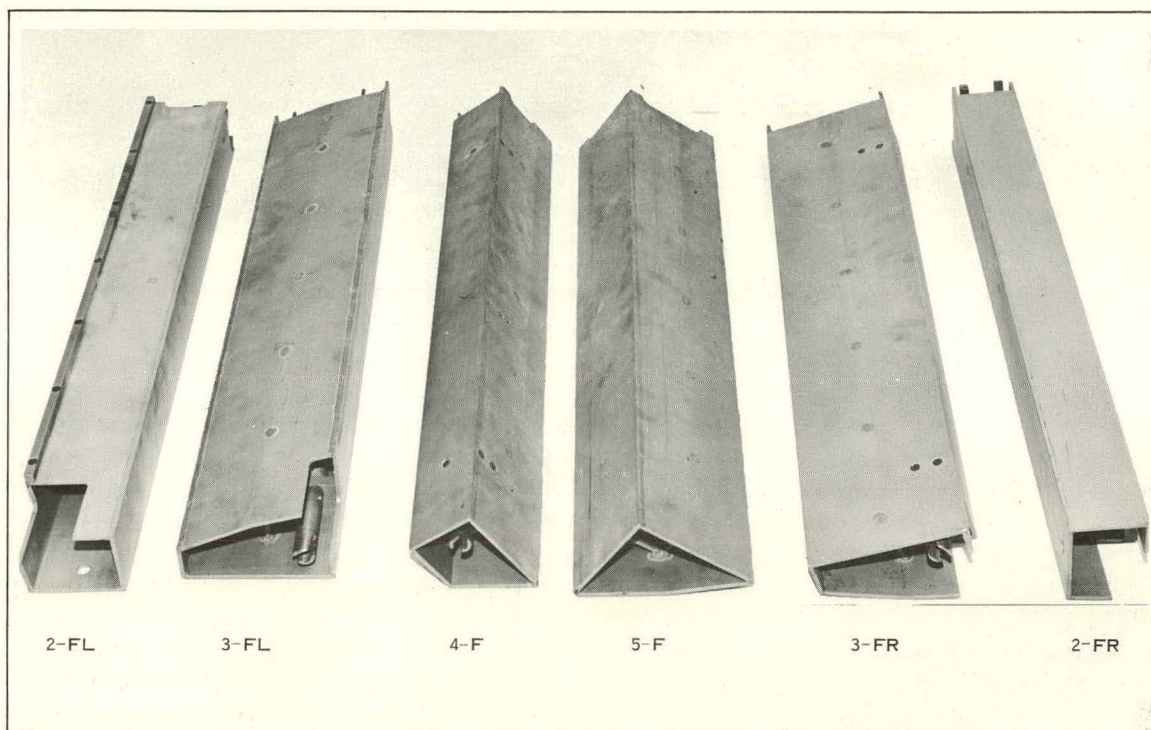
Type 2-, 3-, 4-, and 5-F filler pieces.
